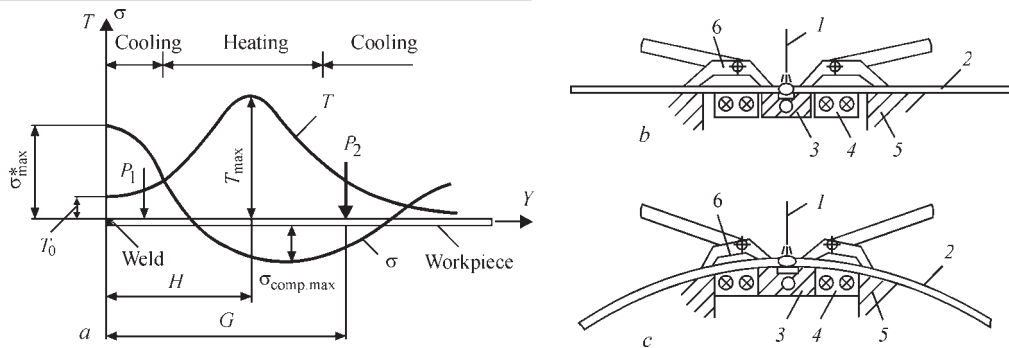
Basic principle for implementation of LSND welding (a), clamping jigs for longitudinal weld in plates (b) and cylindrical shells (c) [4]: 1 — arc; 2 — workpiece; 3 — water-cooling backing bar; 4 — linear heaters; 5 — supporting mandrel; 6 — 'two-point' finger clamping system
